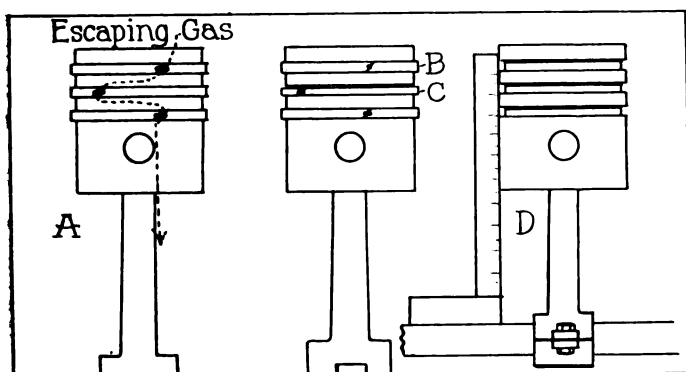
A, Gas Escaping Past Wide Piston Ring Slots; B, Well Fitted Piston Ring; C, Poor Fitting Piston Ring; D, Method of Aligning Piston on Mandrel.
